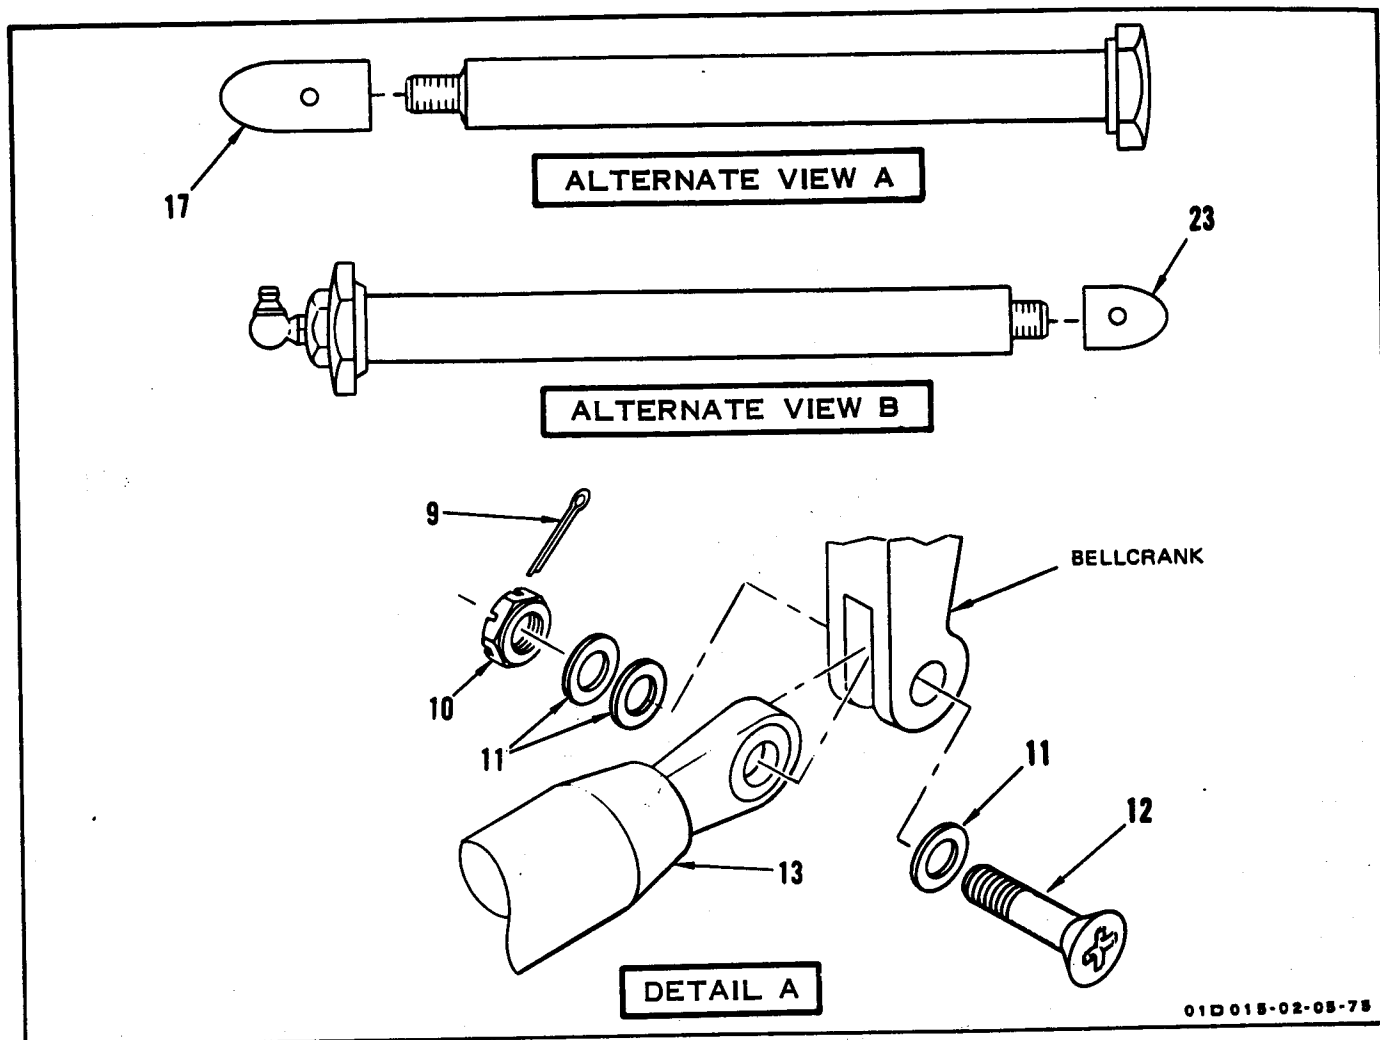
Wing Outer Panel Removal and Installation (Sheet 2)
